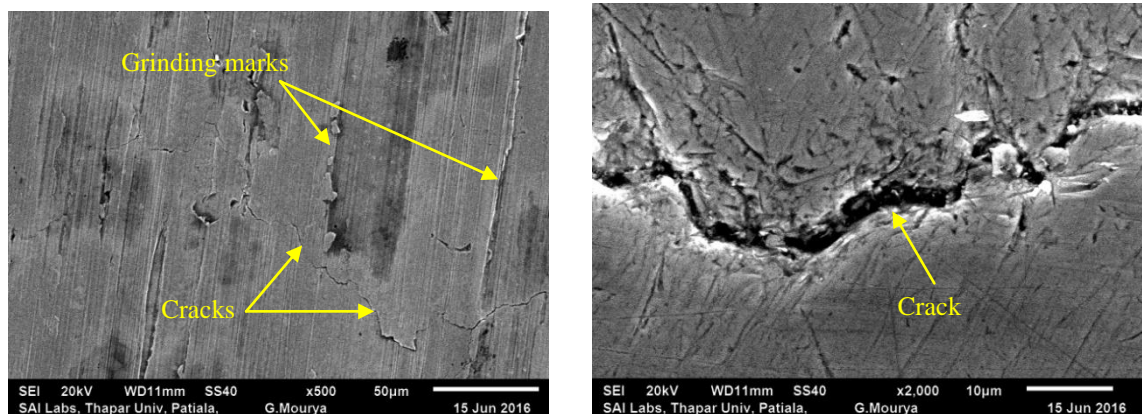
Workpiece after grinding examined under SEM (a) at 500X magnification with grinding marks along with cracks and (b) at 2000X magnification with a closer view of the crack
